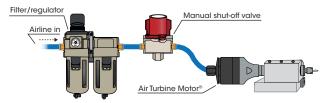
A clean airline from a filter/regulator to a mounted Air Turbine Motor®
